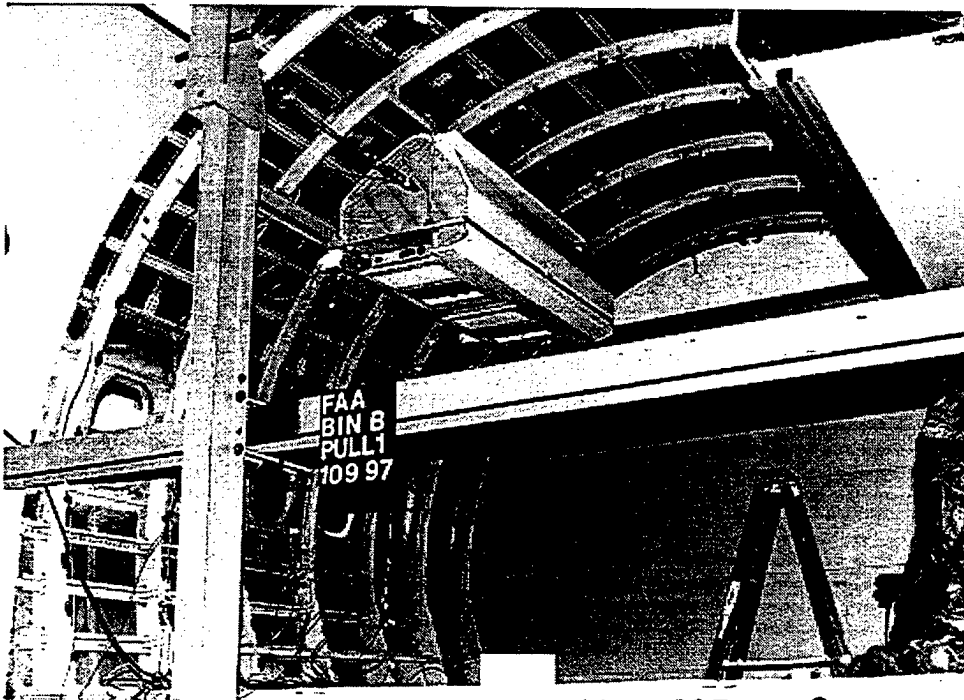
PRETEST BIN B AND TEST FIXTURE FRONT ANGLE OVERALL VIEW
